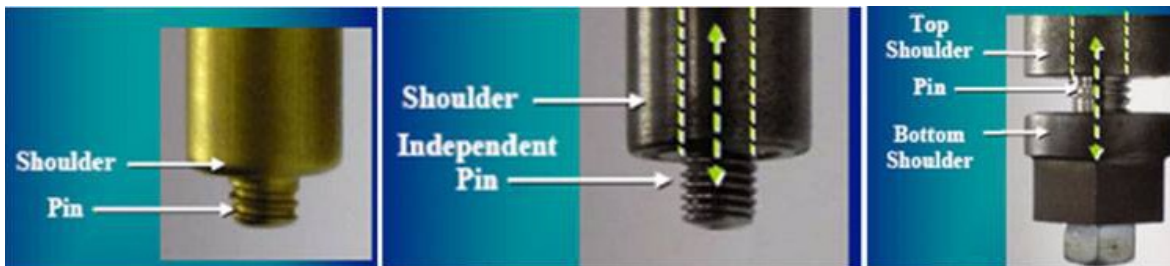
Tools in Friction Stir Welding [40]
